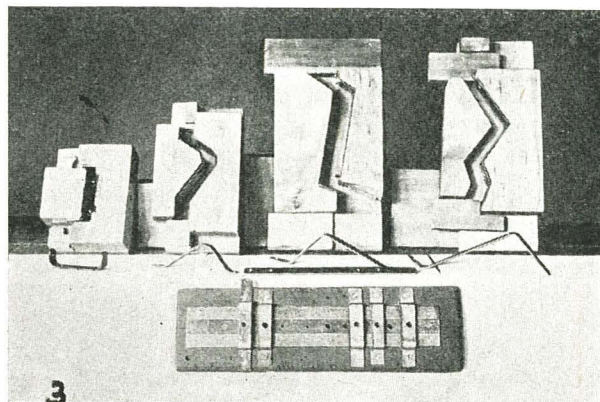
Bending Fixtures and Adjustable Drilling Jig.
